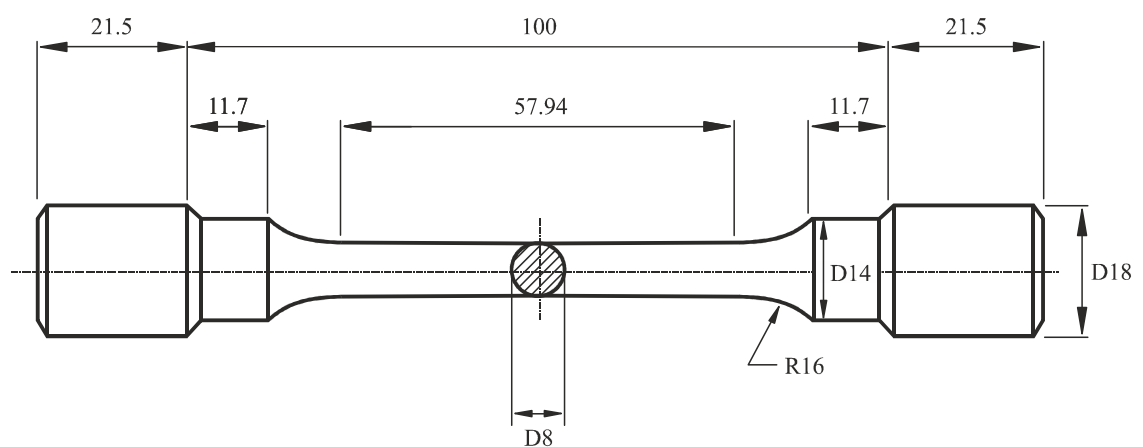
Specimen geometry used in uniaxial tensile tests (in accordance with ASTM E8).
